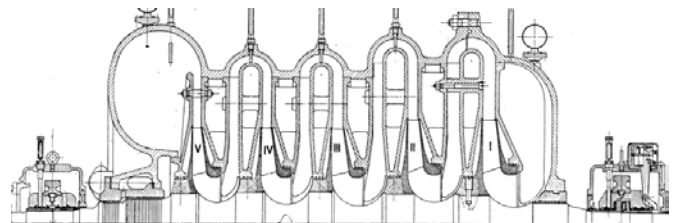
Cross Section of original NO_x-compressor (Courtesy of MAN Diesel&Turbo Schweiz AG)
